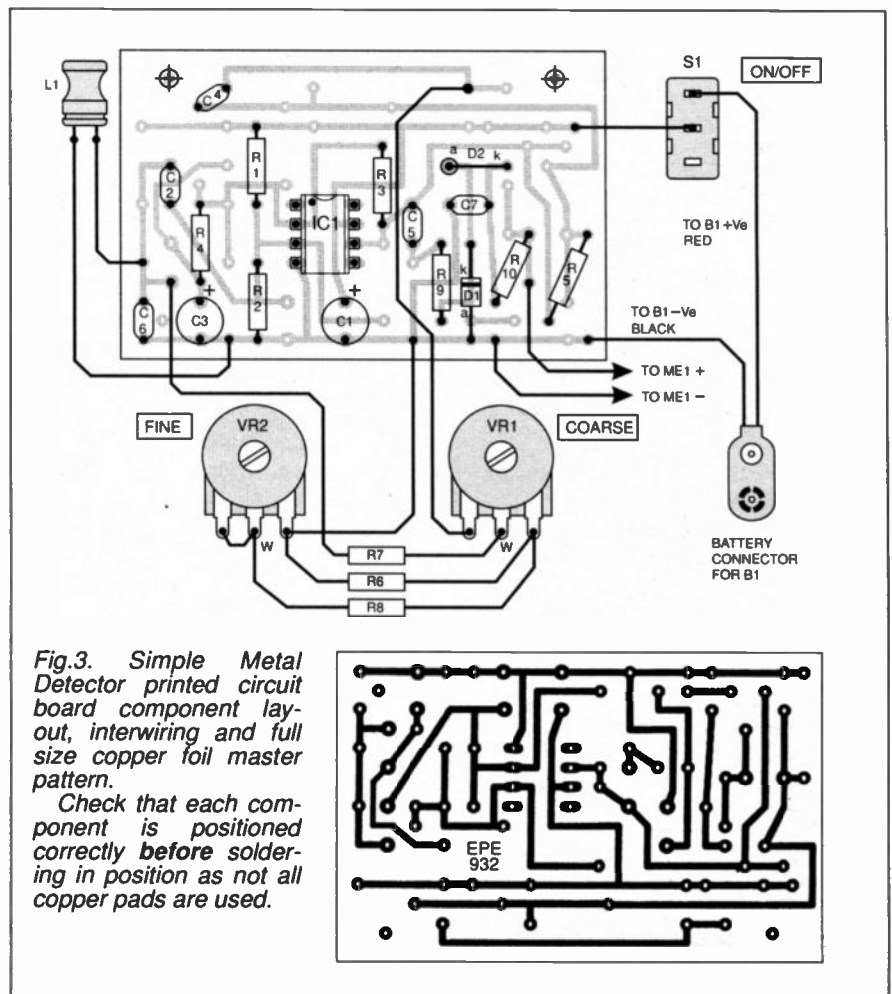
Simple Metal Detector printed circuit board component layout, interwiring and full size copper foil master pattern.
